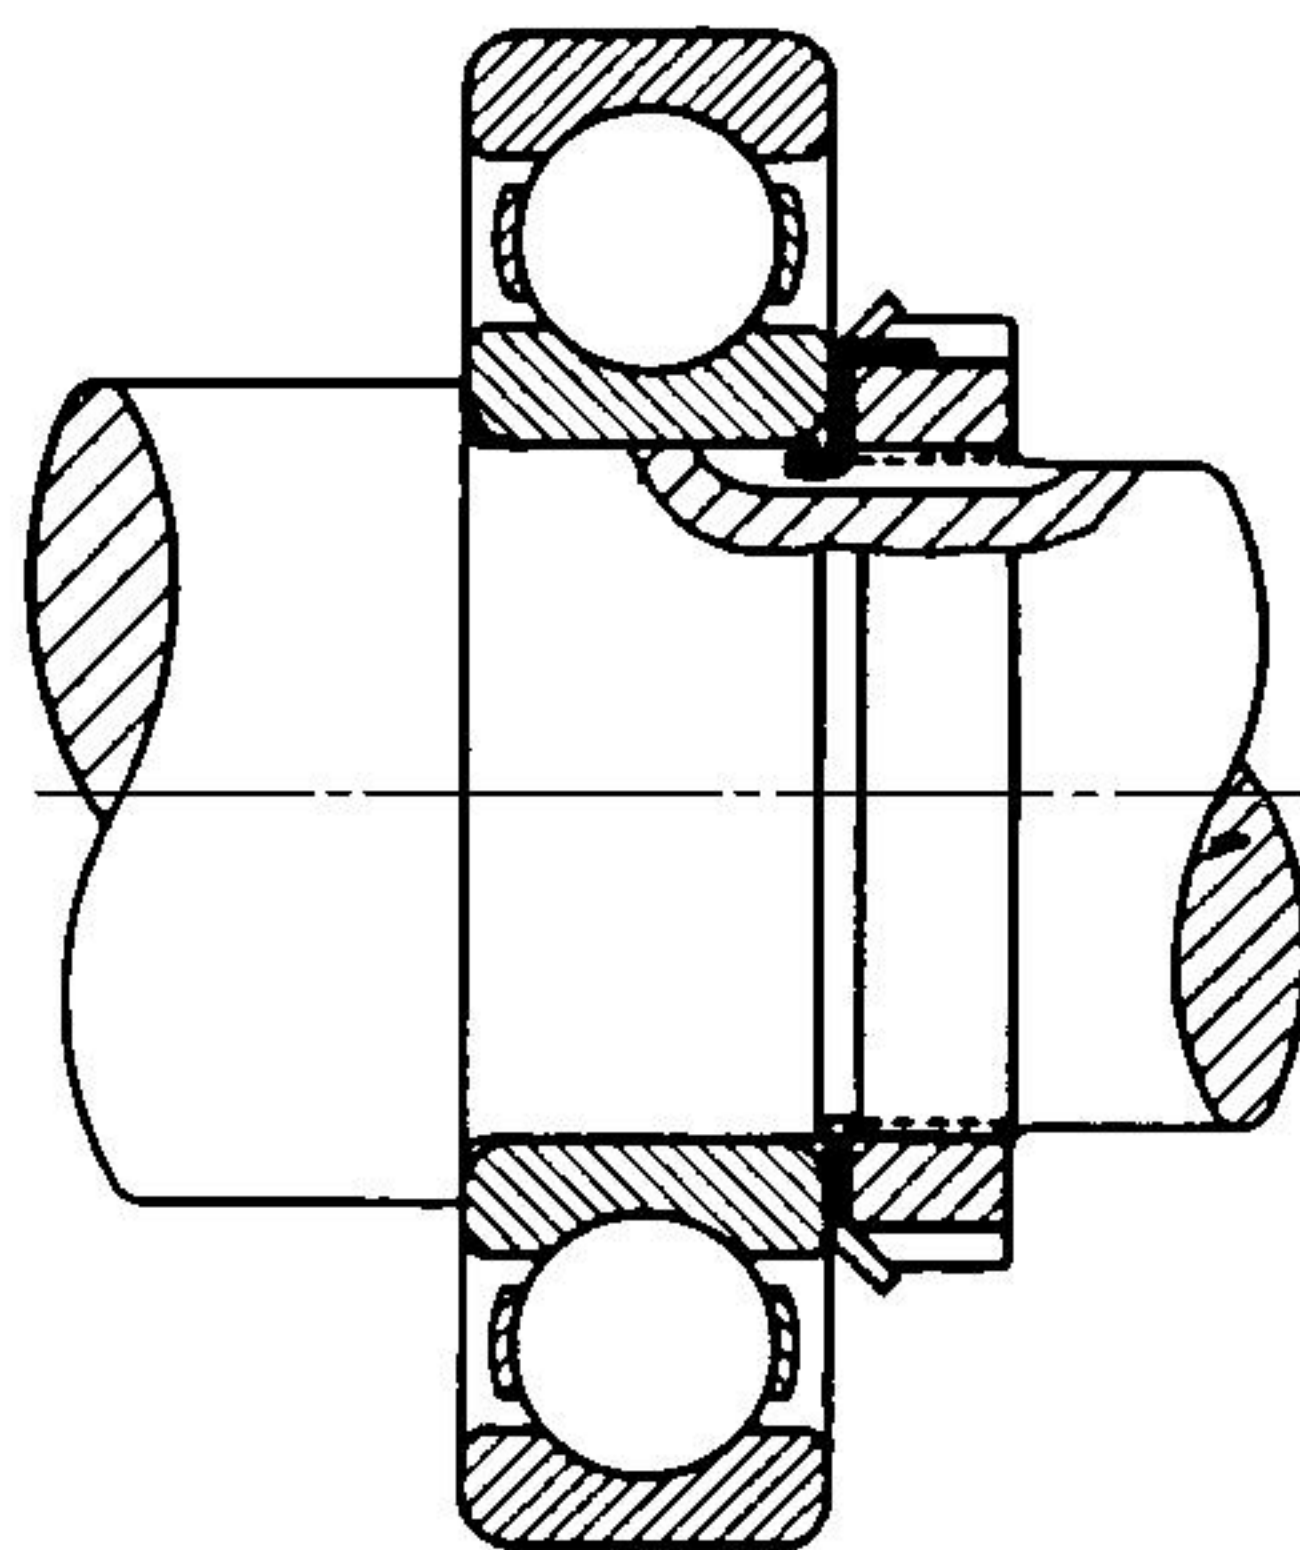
Bearing mounting with a special nut for a through shaft.
